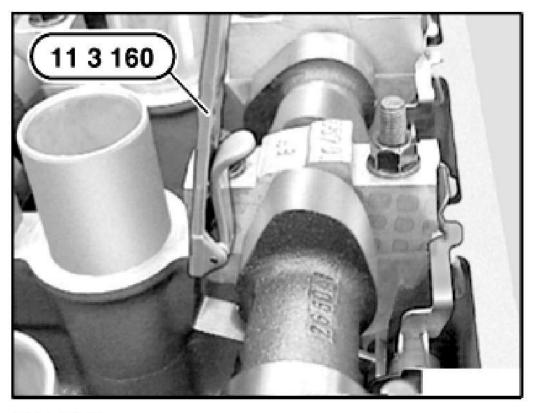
Identifying Adapter With Socket Wrench Courtesy of BMW OF NORTH AMERICA, INC.
